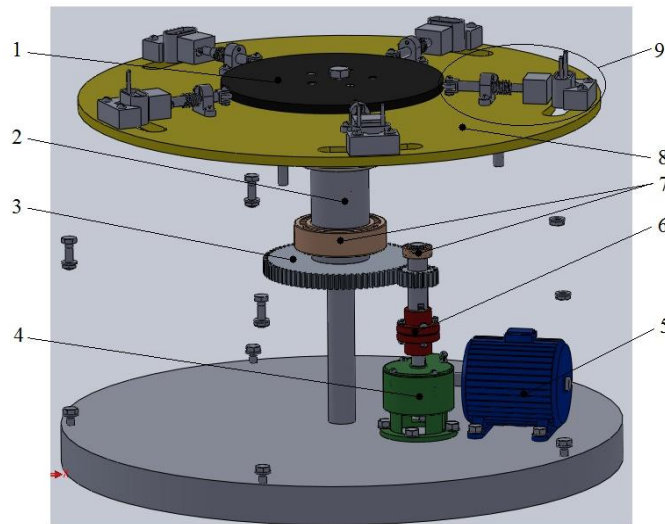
Assembly 3D view and components' identification for the indexing mounting table (Solid Edge 3D parameterized model): 1 – fixed cam; 2 – shaft; 3 – spur gear; 4 – worm gearbox; 5 – electrical motor; 6 – flexible coupling; 7 – radial ball bearing; 8 – rotary plate; 9 – orienting-fixing device.
